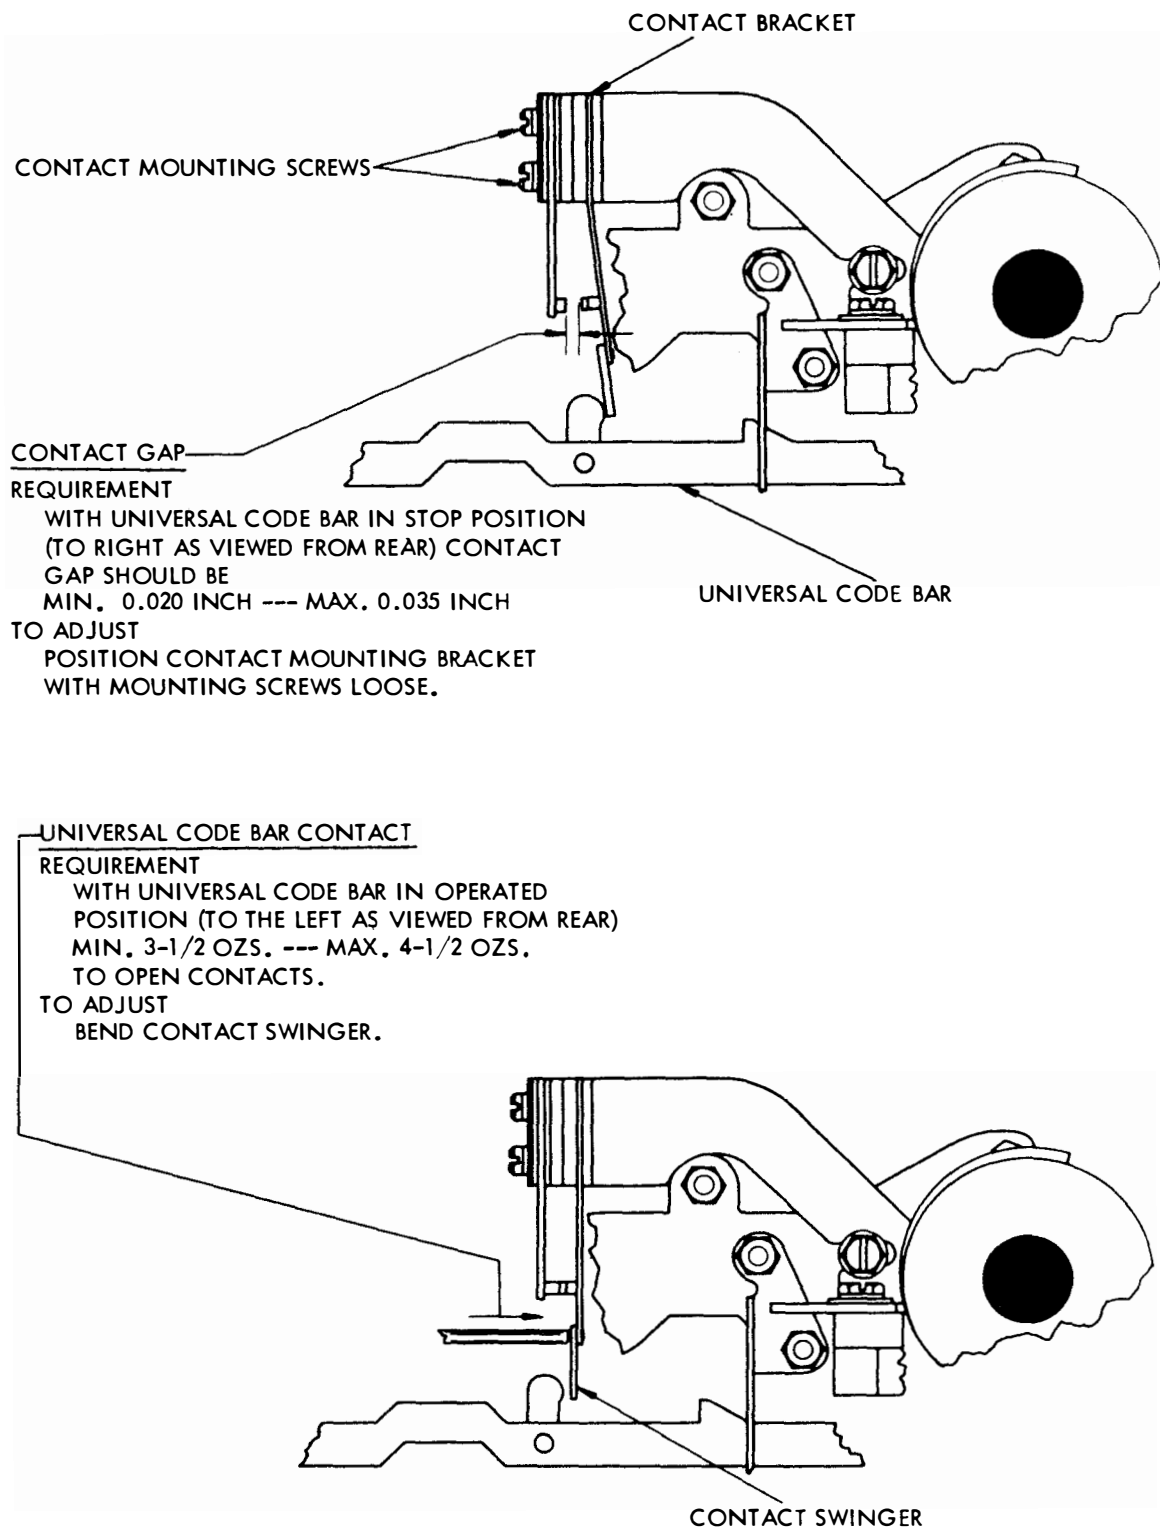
B. Keyboard, Conditioning Contact Mechanism
